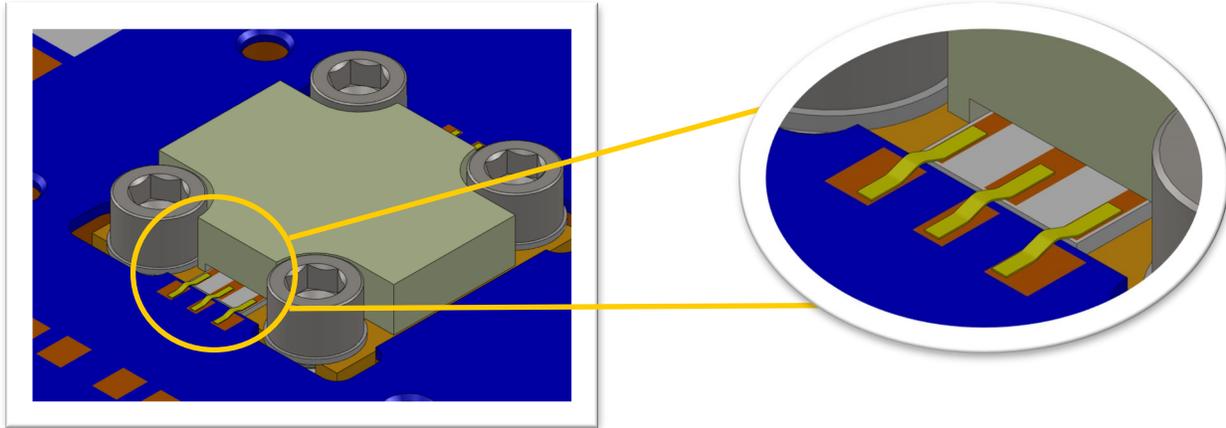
Illustration of CMPA2560025F Installed at Next Level Assembly
